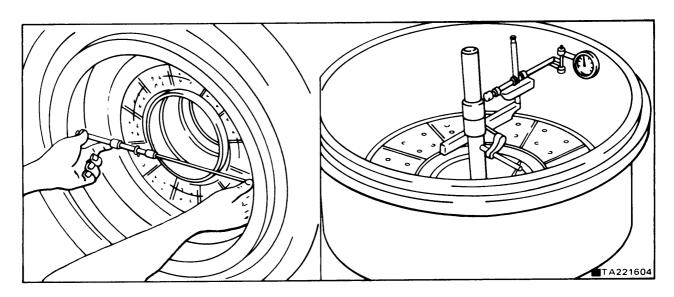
CHECKING FOR OUT-OF-ROUNDNESS.
